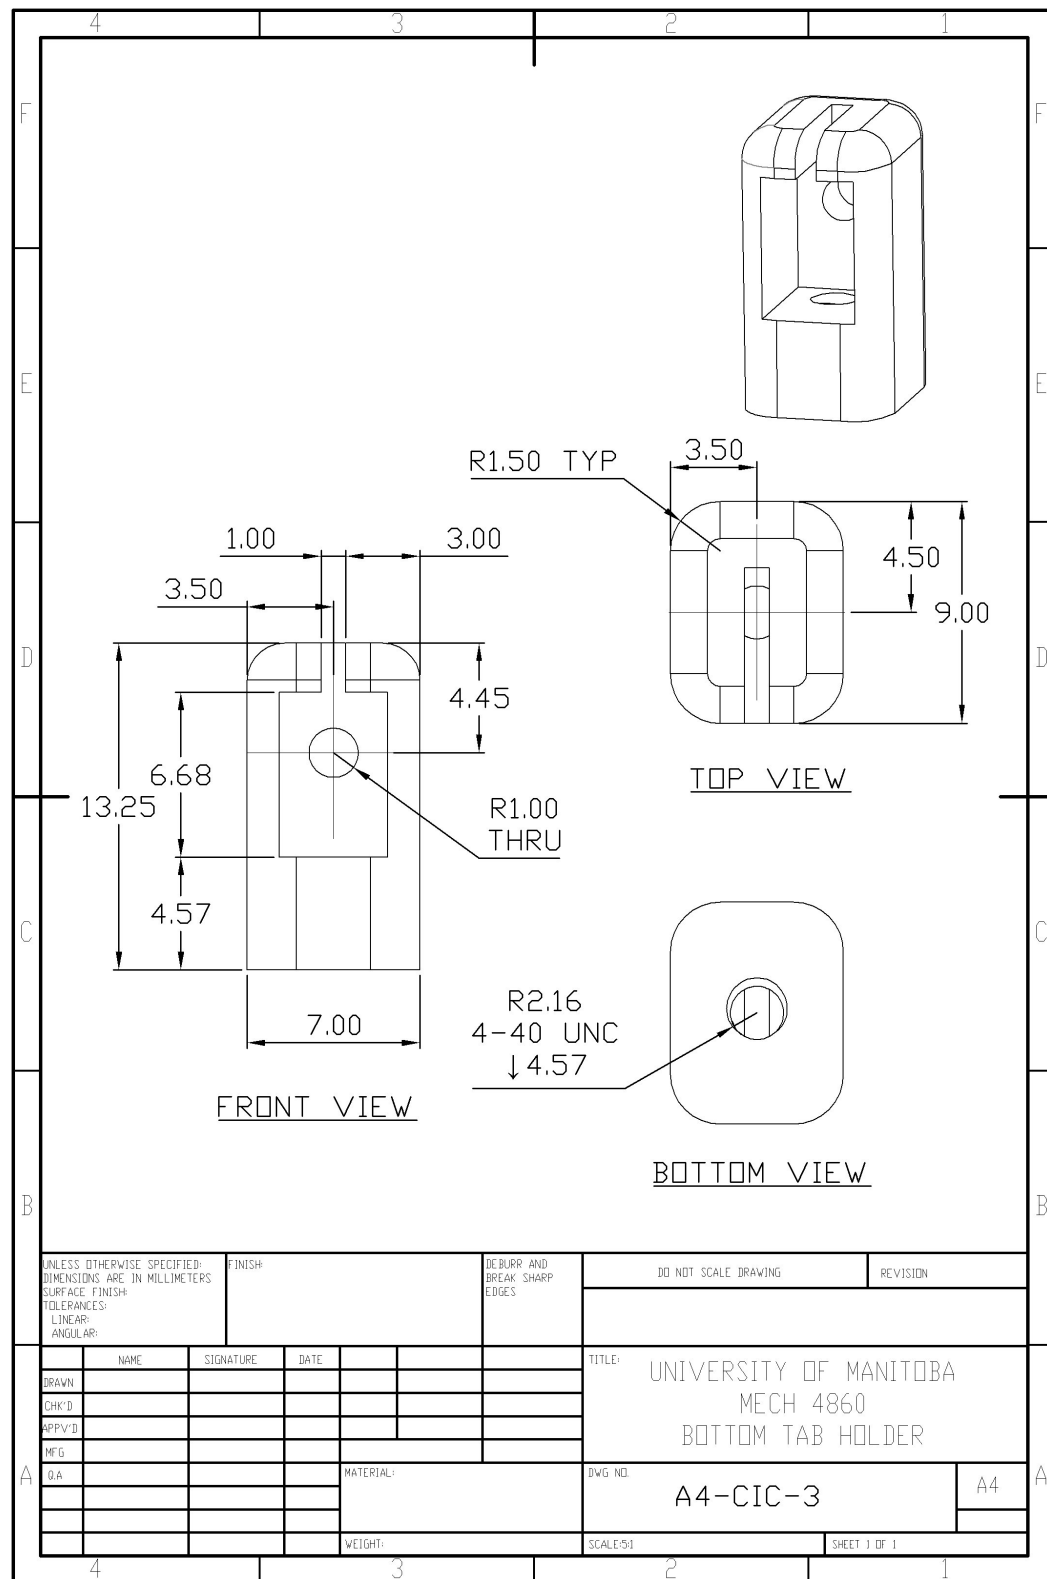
Technical Drawing of Bottom Tab Holder [7]
